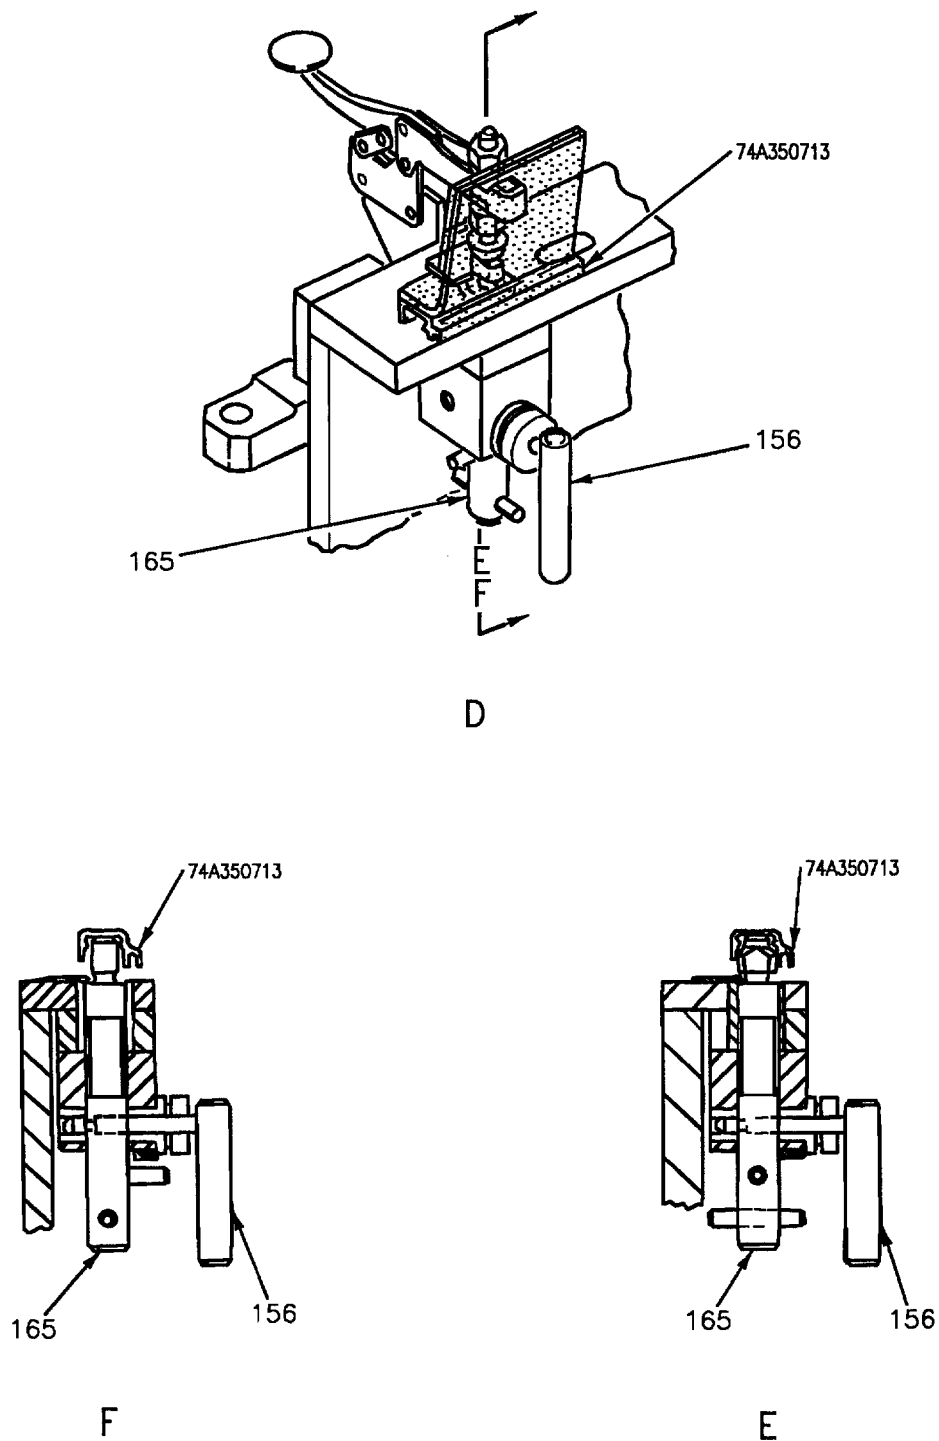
Inspection or Replacement - Hinge and Pivot Stop (Sheet 3)
